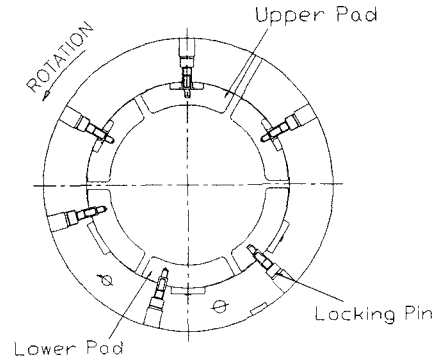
LOP type 6-pad tilting pad journal bearing for a fossile power plant
